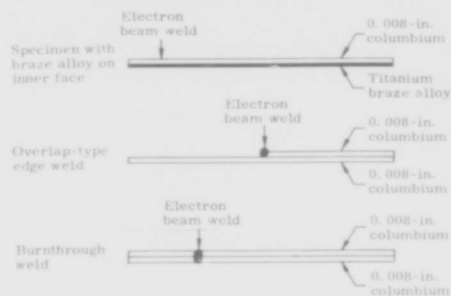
Specimens Used in Electron Beam Welding Study
